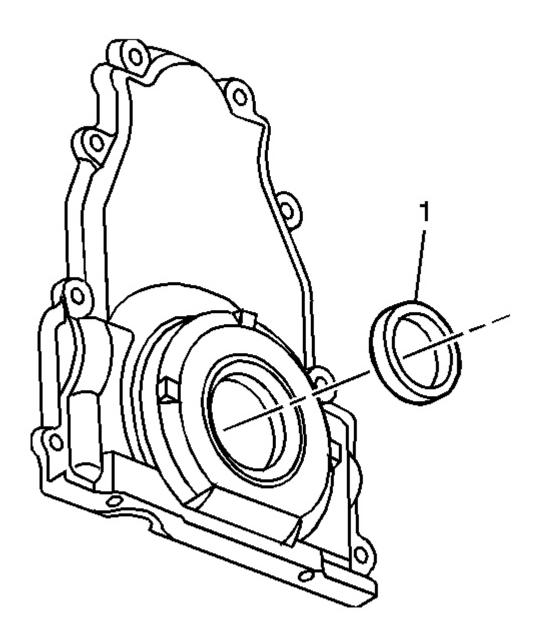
View Of Crankshaft Front Oil Seal Courtesy of GENERAL MOTORS CORP.
